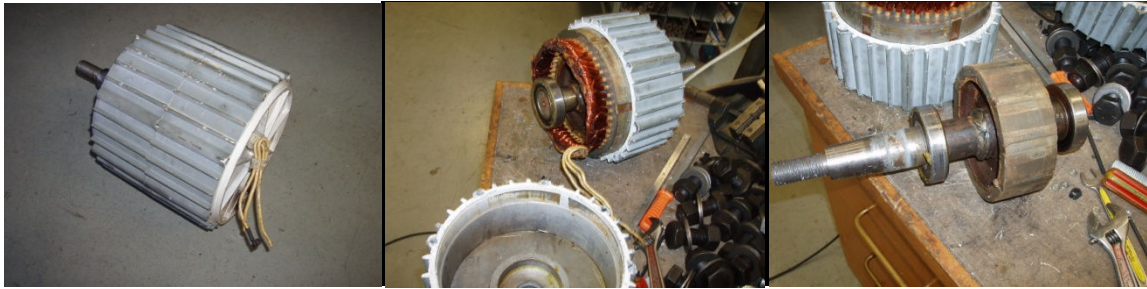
Generator assembled (left) and disassembled (middle and right) showing permanent magnet rotor
